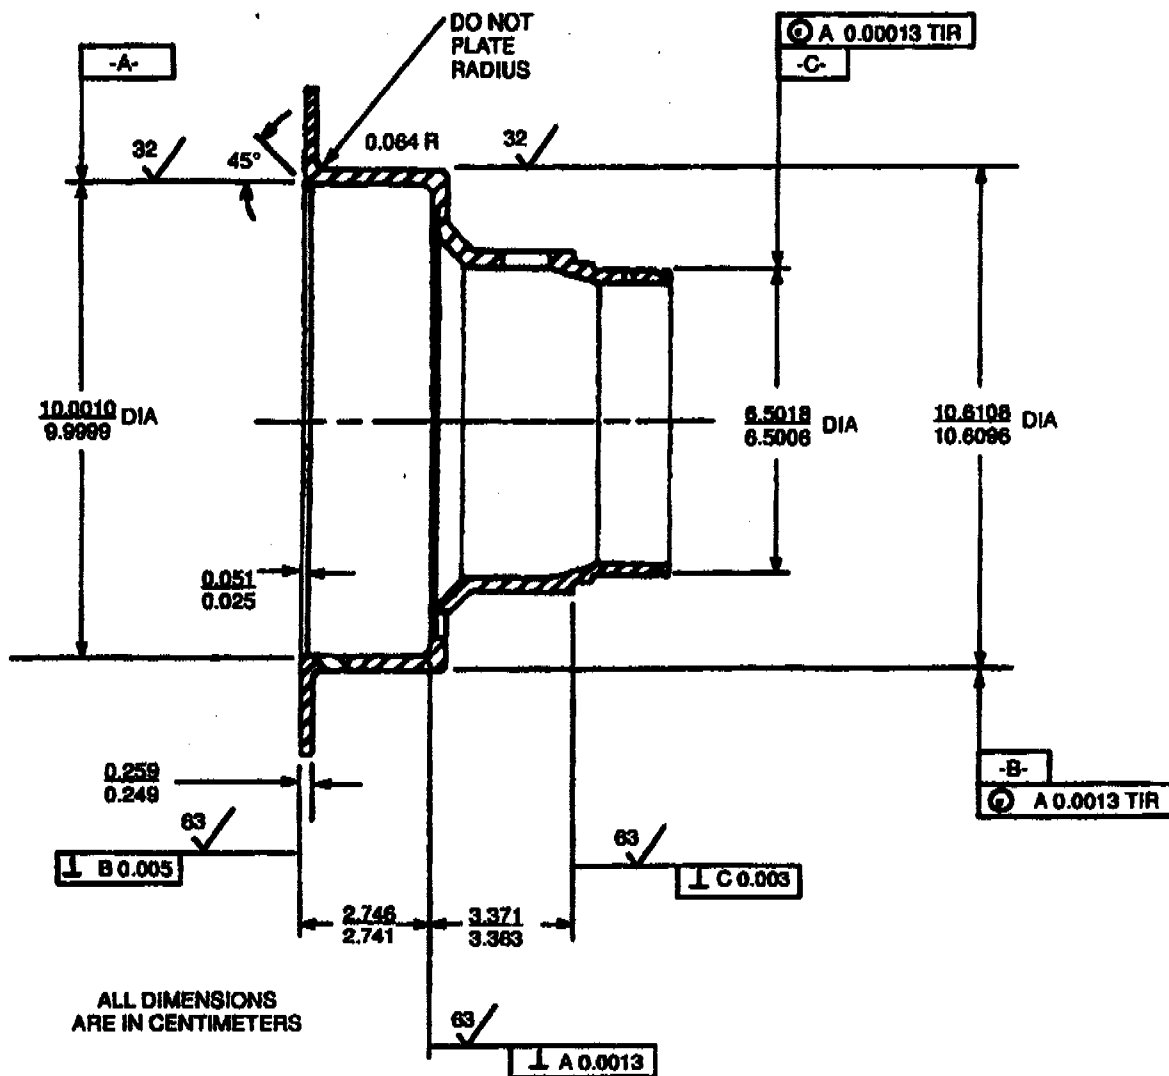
Bearing Support Liner - Repair Area (Metric).
